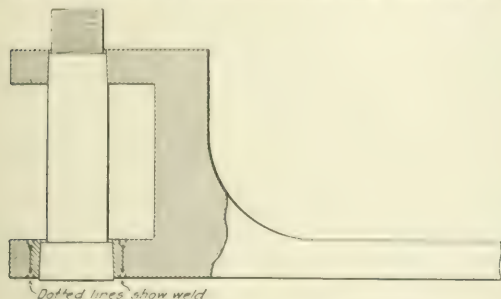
End of Eccentric Blade Repaired by Oxy-Acetylene Welding.
